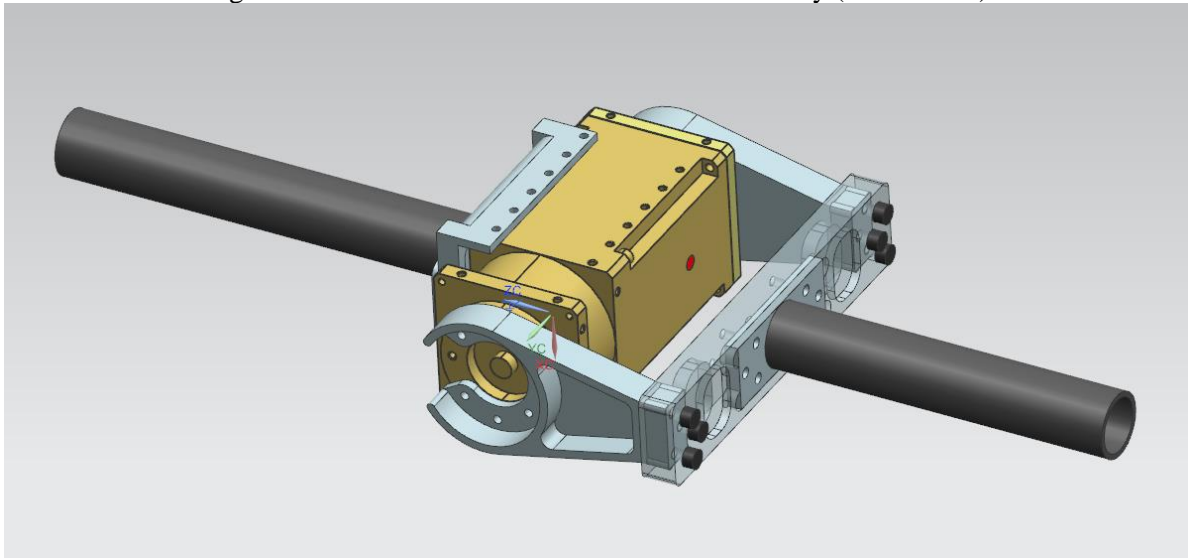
CAD Model of Modular Knee Assembly (Back View)
